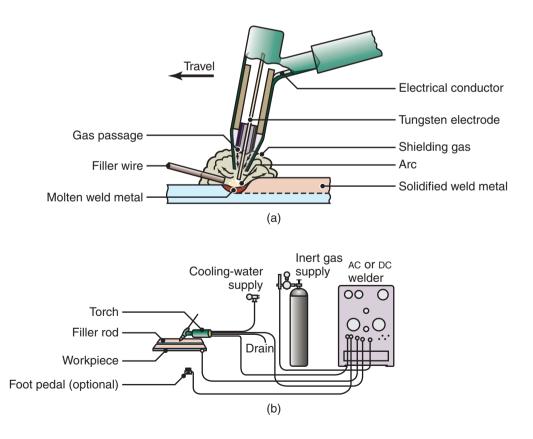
(a) The gas tungsten-arc welding process, formerly known as TIG (for tungsten–inert gas) welding. (b) Equipment for gas tungsten-arc welding operations.
